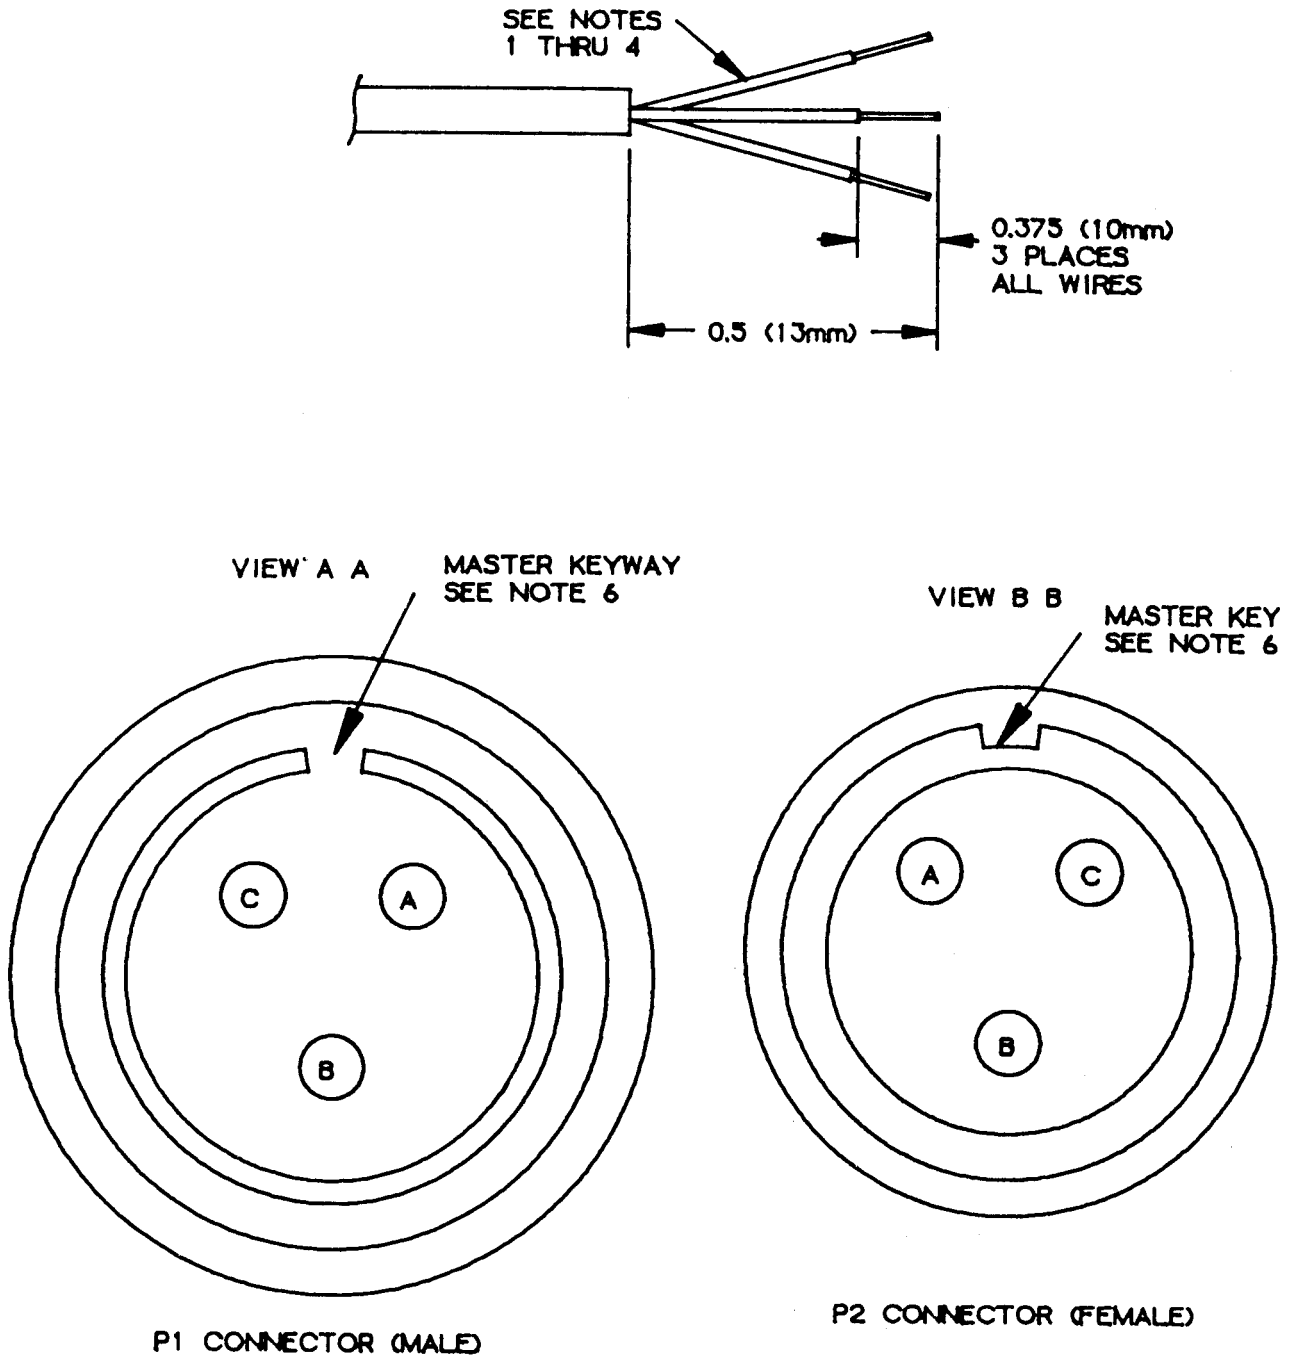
20-amp, 50-ft (15.24m) extension cable. (sheet 2 of 3)
